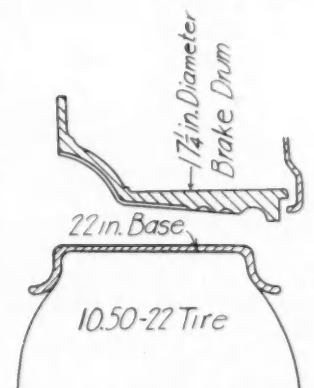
CLEARANCE PROVIDED BY 22-IN.-BASE TIRE AND $17\frac{1}{4}$ -IN.-DIAMETER BRAKE-DRUM OF THE TYPE SHOWN AT E IN FIG. 8
